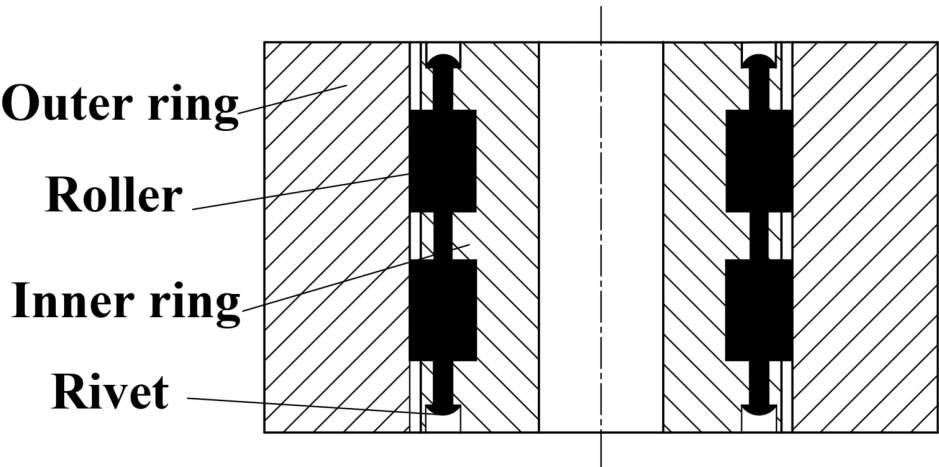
No holder cylindrical roller bearing CN208089758U.
